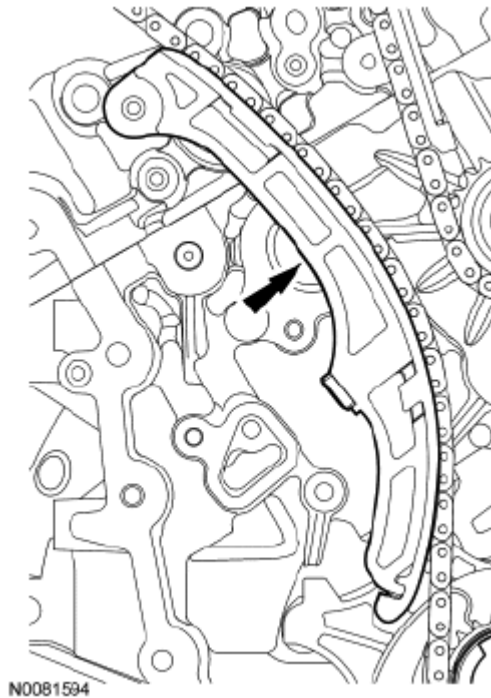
Locating Primary Timing Chain Tensioner Arm
